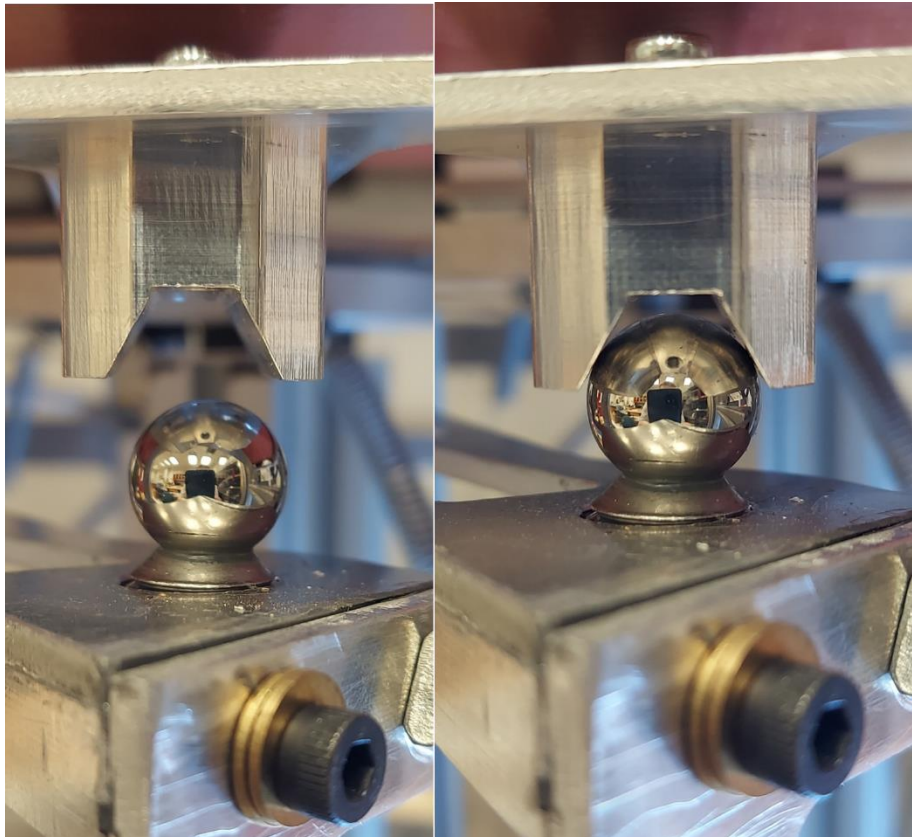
Detailed view showing the mated (right) and separated (left) states of one of the three bearing ball and vee block pairs that make up the kinematic coupling.
